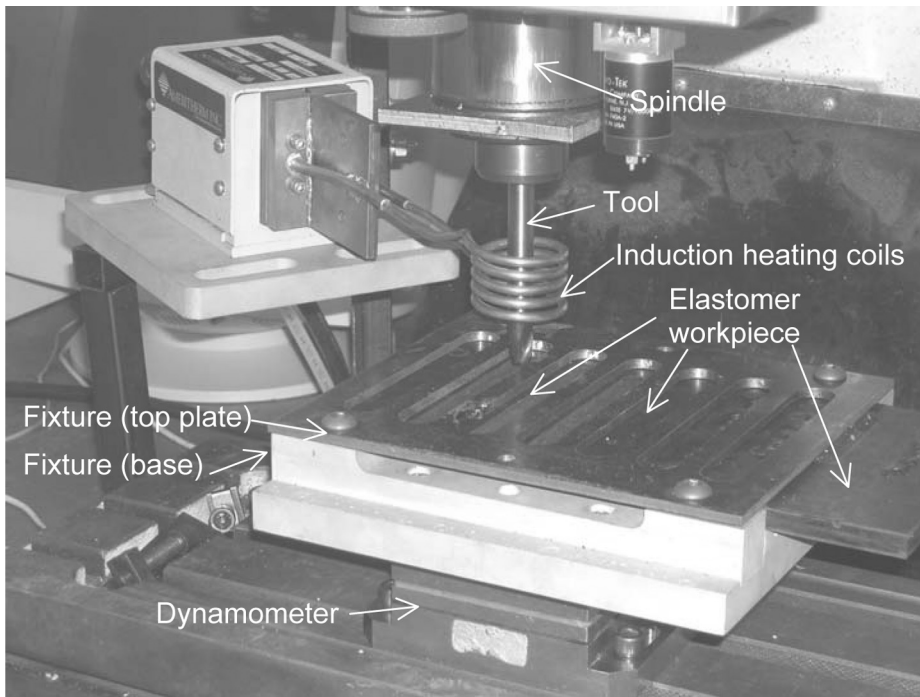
Experimental setup of elastomer end milling with tool induction heating.
